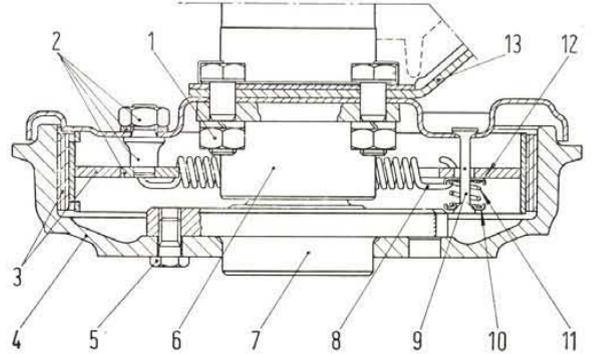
Sectional view of right side rear wheel. (Up to car with No. for spare 802091).
